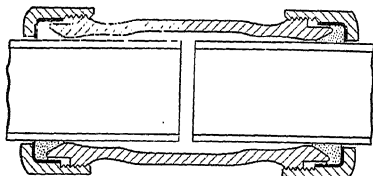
Malleable-iron compression coupling with threaded packing nuts for general use on underground piping—gas, water, oil, or other services. (Courtesy of Dresser Manufacturing Company.)
